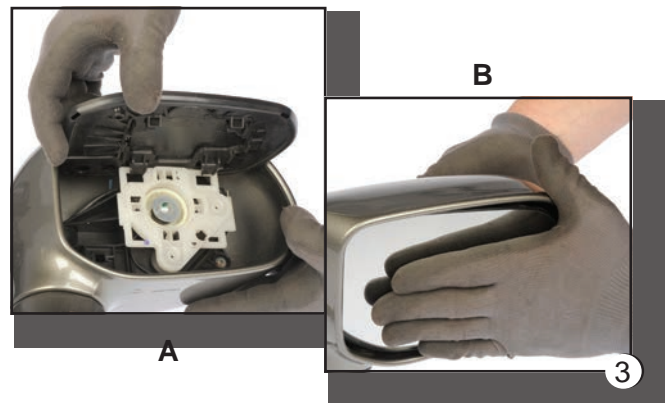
Removing the broken mirror glass assembly from the current housing.
